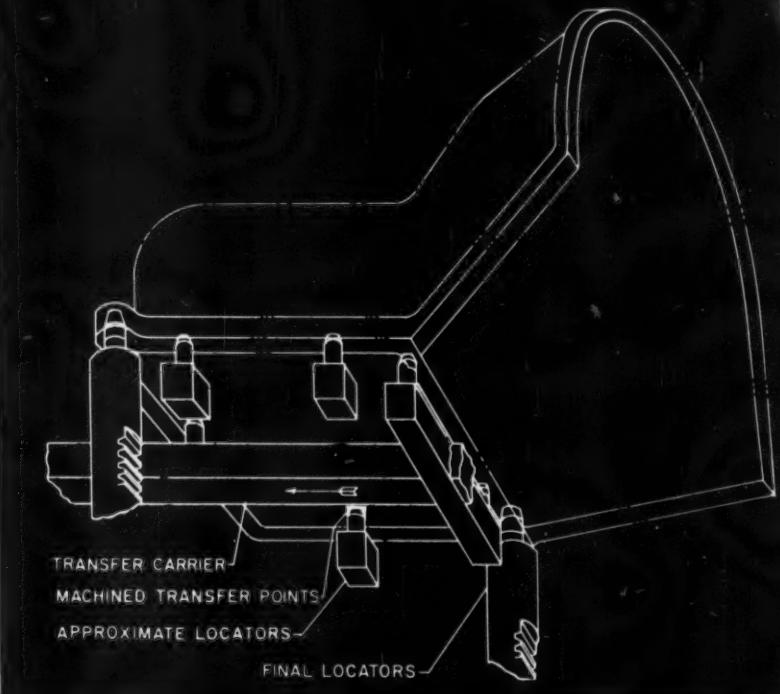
(Right) To protect the locating surfaces and holes, approximate locators receive parts from the transfer carrier and align them with final locators. A double pressure clamp prevents tipping the light parts when the locating pins enter.
